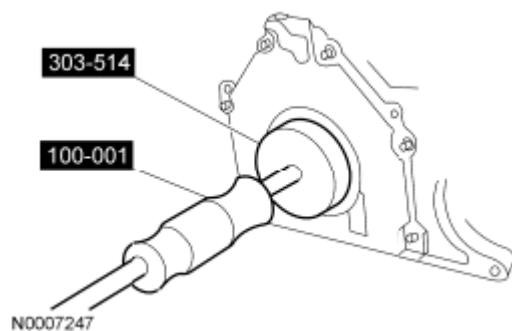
Identifying Slide Hammer And Crankshaft Rear Oil Slinger Remover
